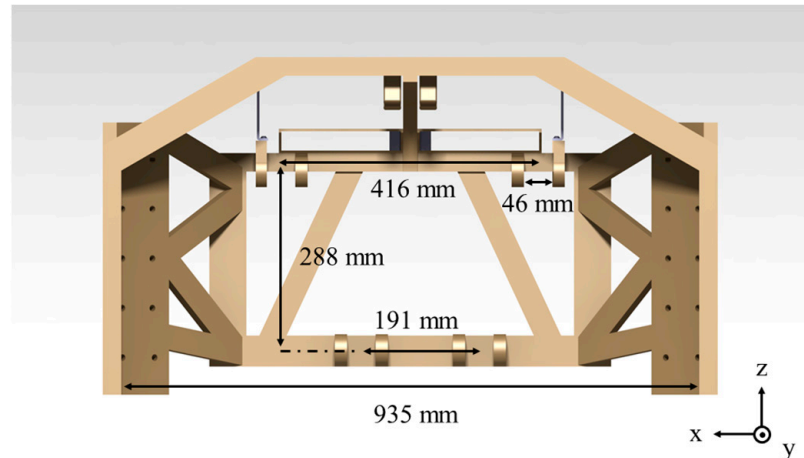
Side panel of the subframe in the wheel-side view with dimensions.
